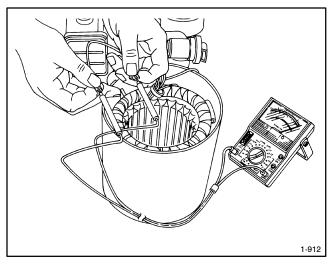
Testing Stator Windings (10/12RY Shown)
